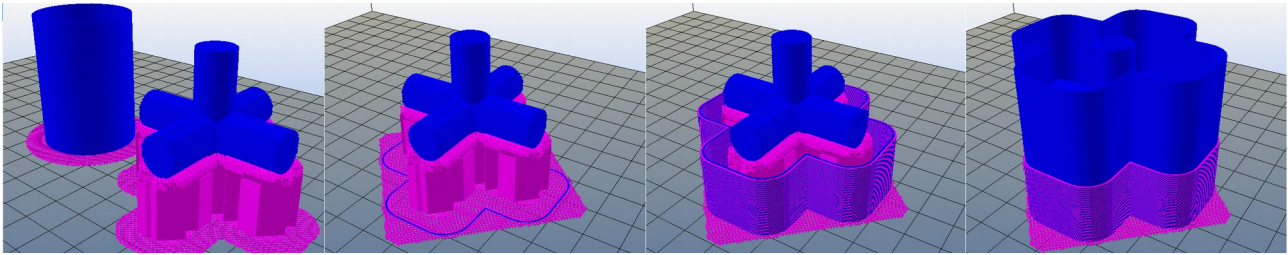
Prime pillar / Skirt / Short Wall / Wall
